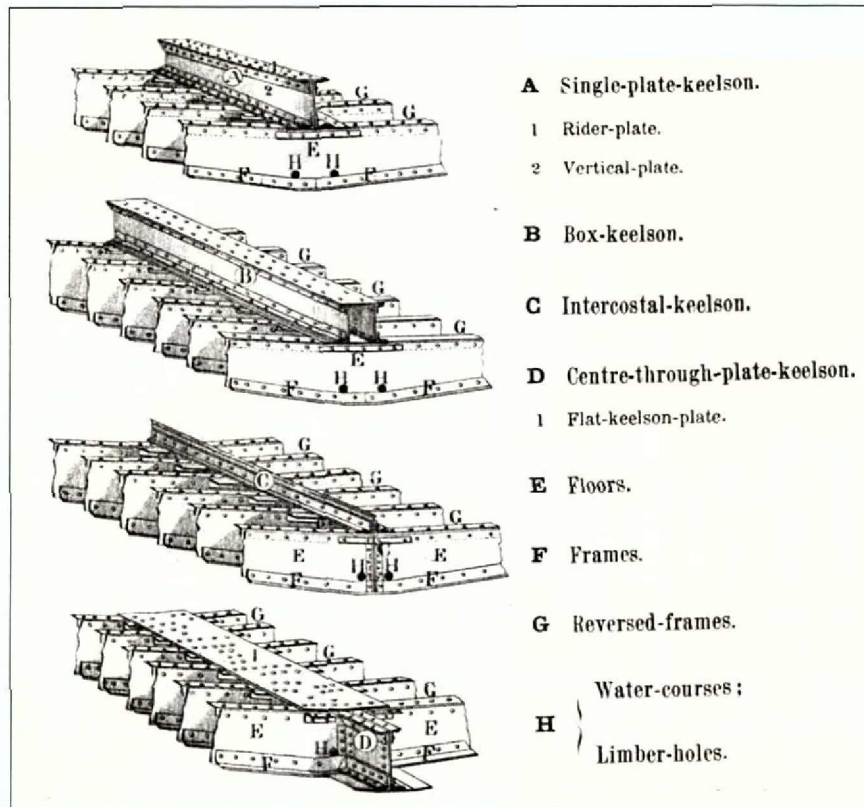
Illustration showing frame construction present in SS16B (after Paasch 1890 Plate 38)
